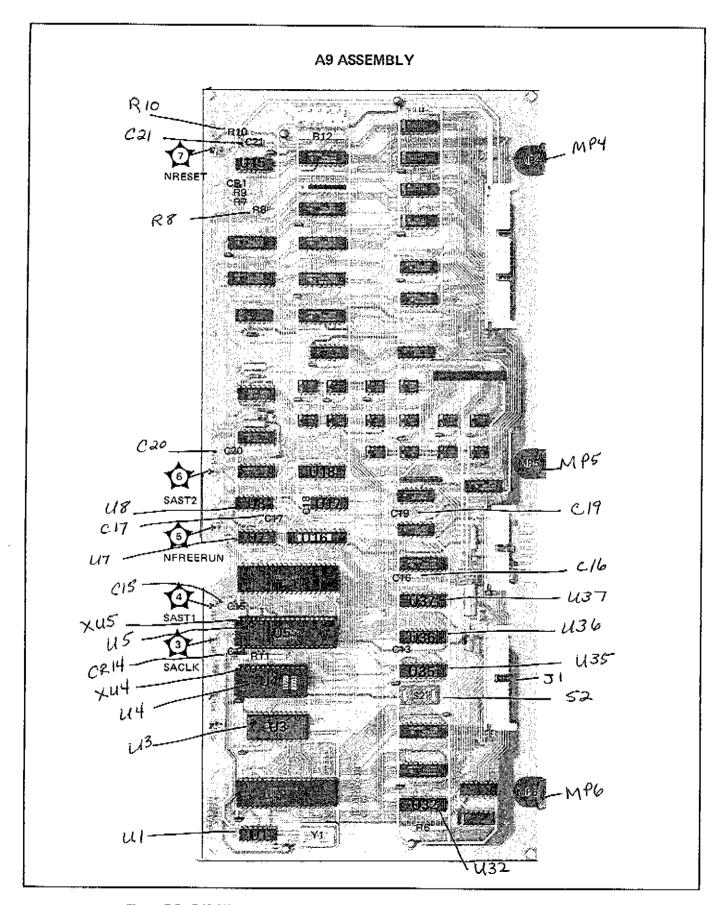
P/O Microprocessor Board Assembly Component Locations (P/O Change D)
